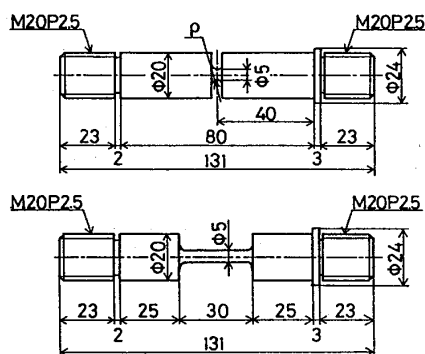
Shapes and dimensions of smooth and notch specimens.
